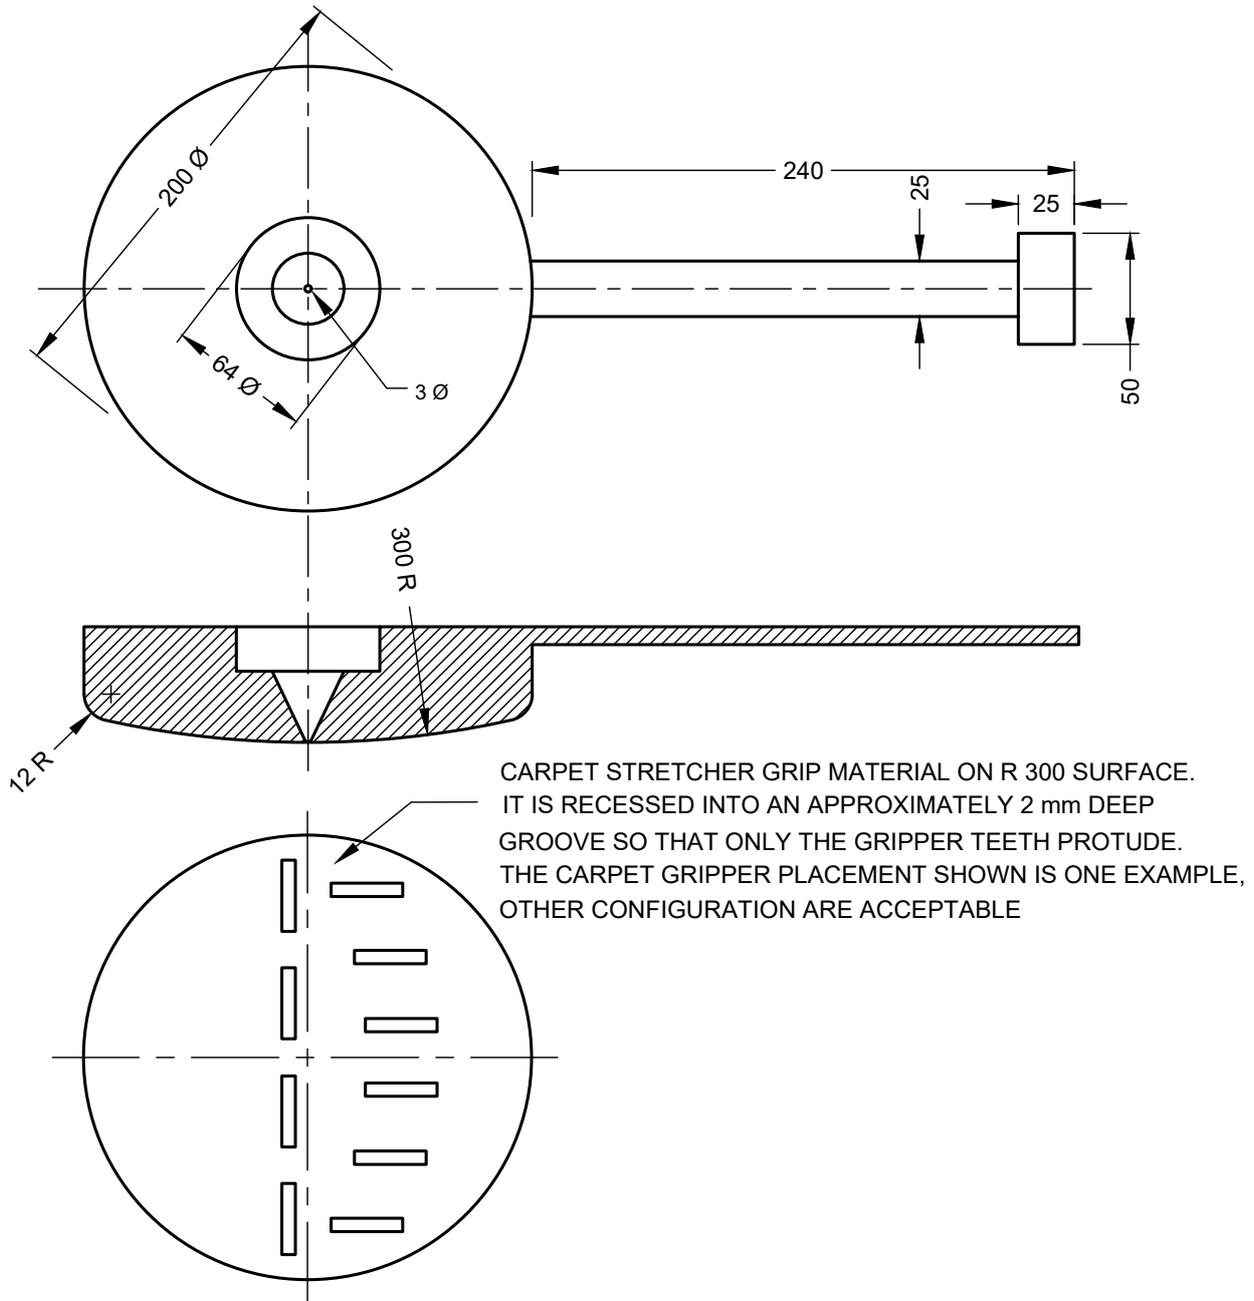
EXAMPLE OF ARM-REST LOADING PAD
